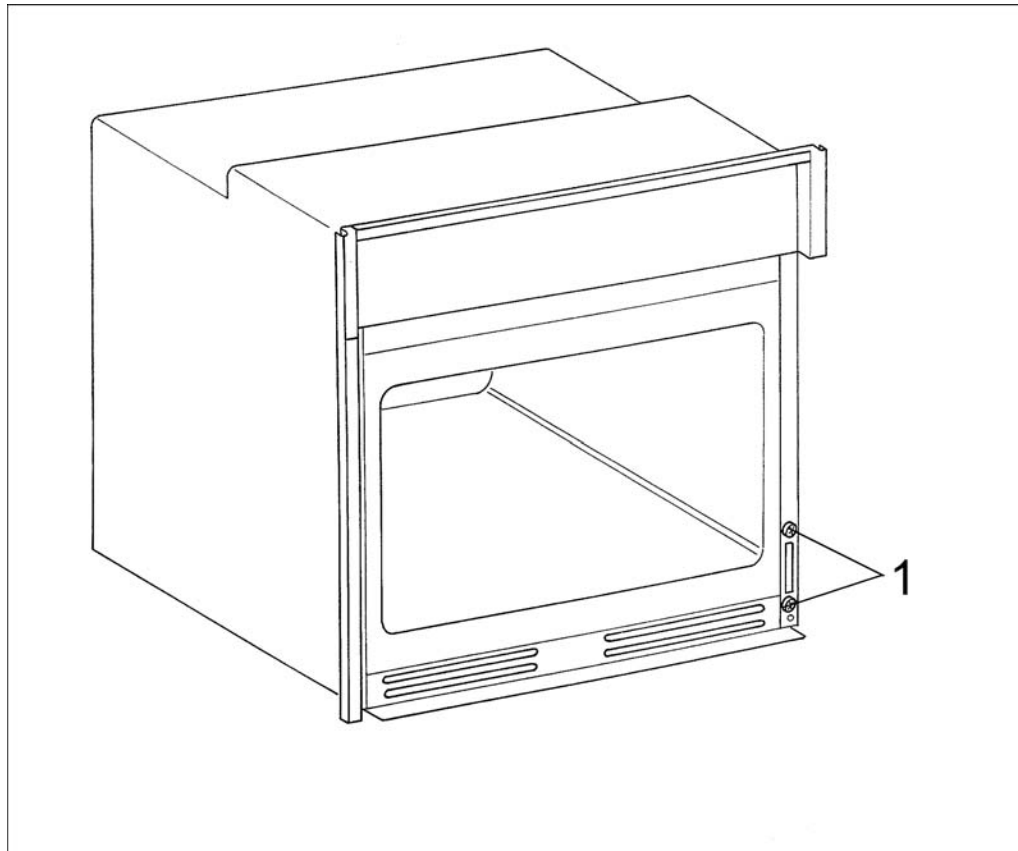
Deflector Strip Aft Mounting Screws
